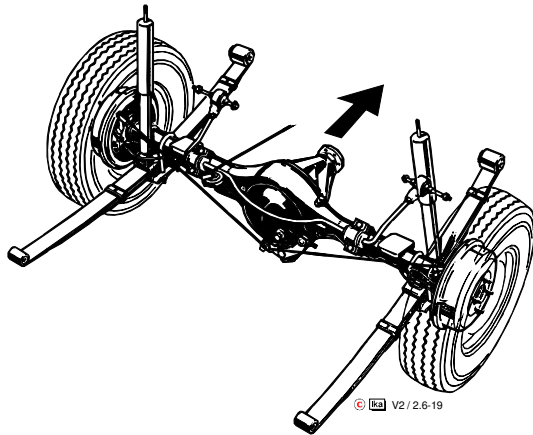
Automobile rear axle guided by leaf springs (Ford Capri)
